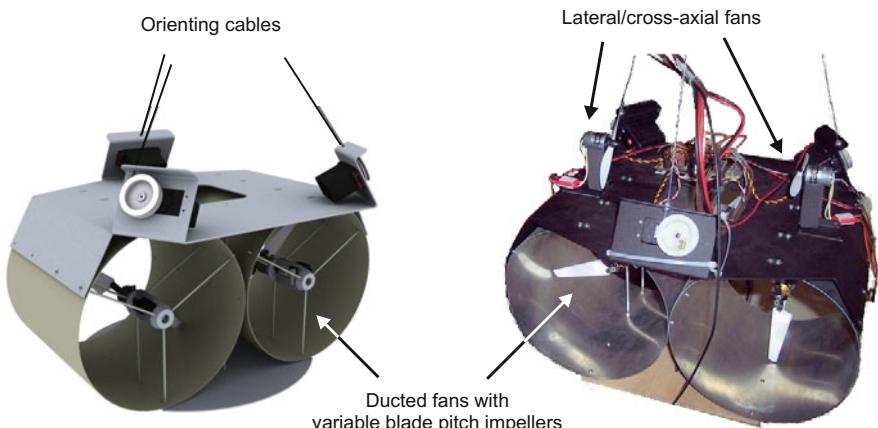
First prototype of ACROBOTER: CAD design (left), built prototype with complementary lateral/cross-axial fans (right)
